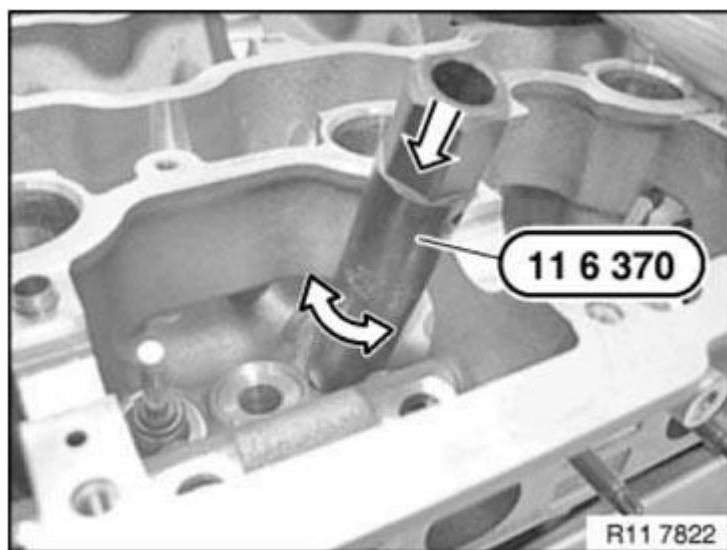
Pressing Special Tool 11 6 370 Onto Valve Stem Seal
